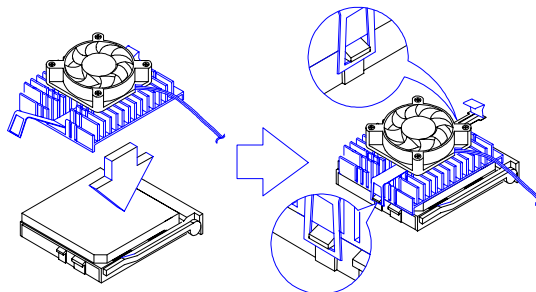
Attaching the Heatsink and Fan to the CPU
